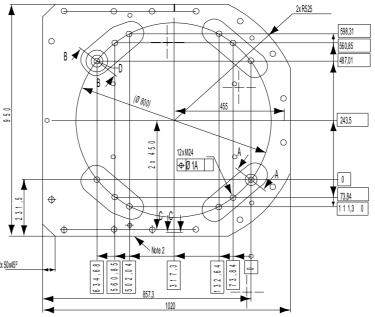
Base plate dimension print, main dimensions and holes measurements (dimensions in mm).
